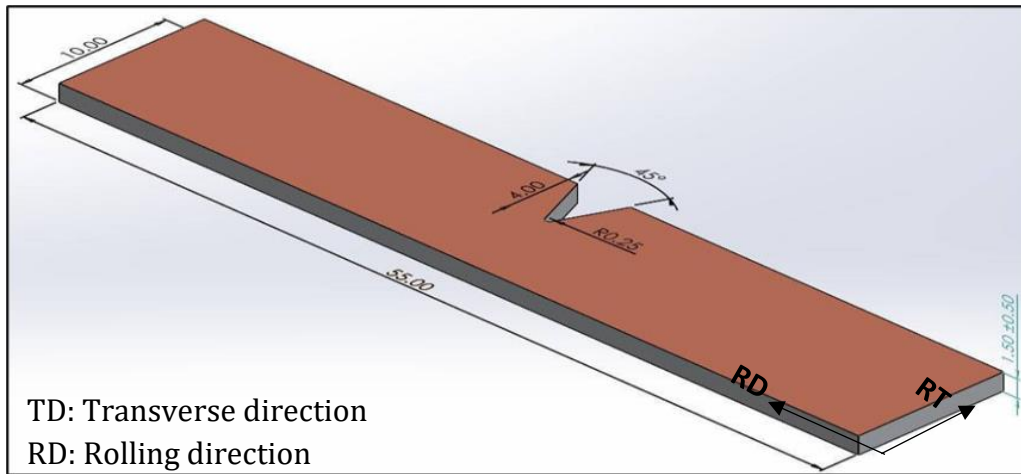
The standard shape and dimensions of the V- notch impact test specimens
